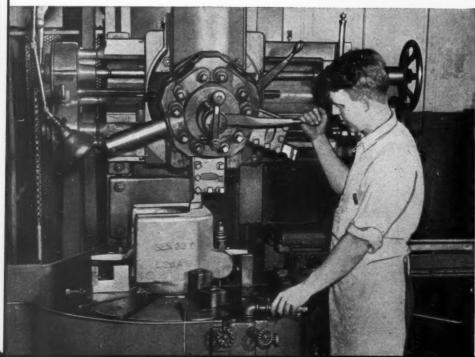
A vertical turret lathe is used to produce locating surfaces on a breech-ring forging
